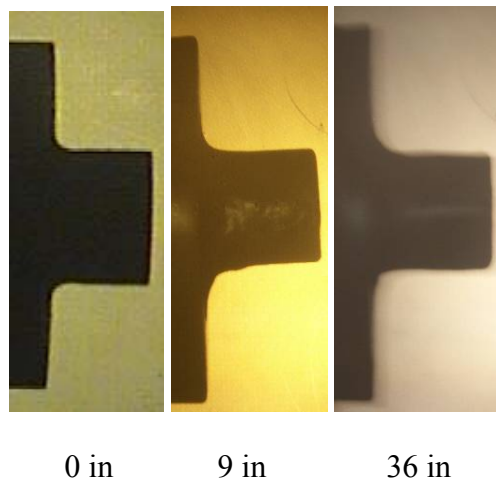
Wear of Trivex tool for butt welding of Al 6061/SiC/17.5p at 1350 rpm and 10 ipm.
